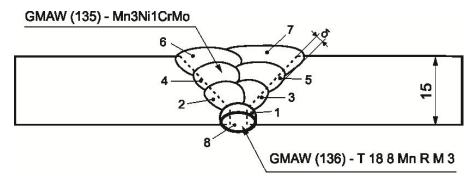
Deposition of the weld layers by the GMAW/GMAW technology
